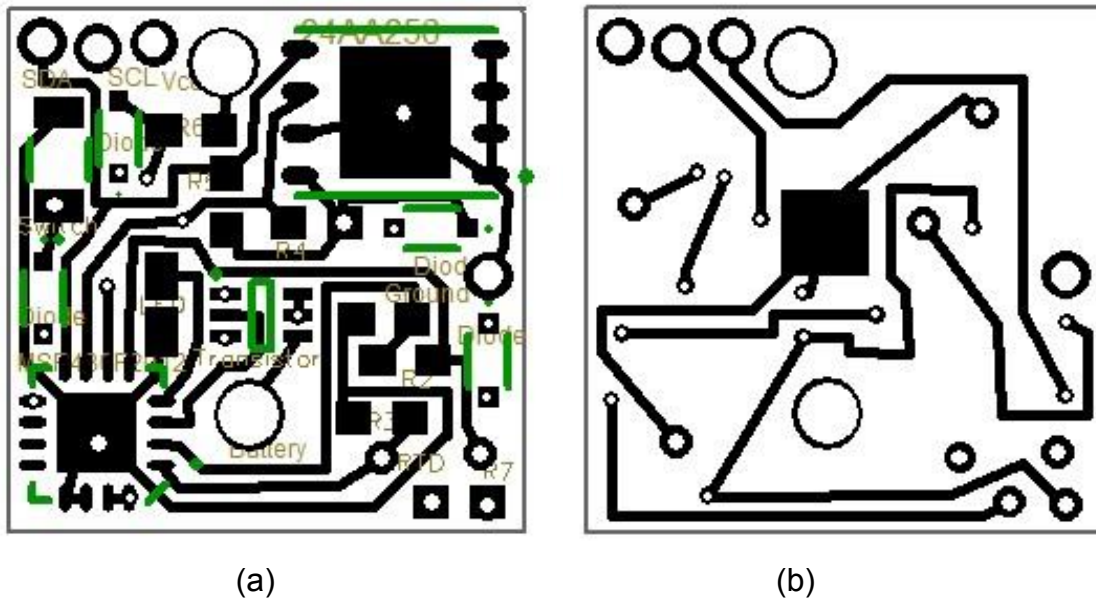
PCB Design (a) Top Side (b) Bottom Side
